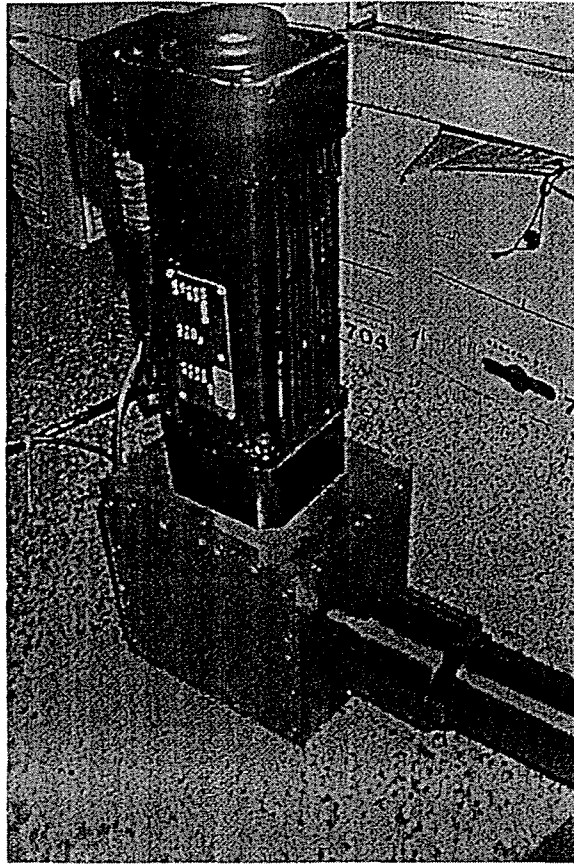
Apex 40 Servo Motor and Concentric Dual Output Planetary Gearbox Assembly
